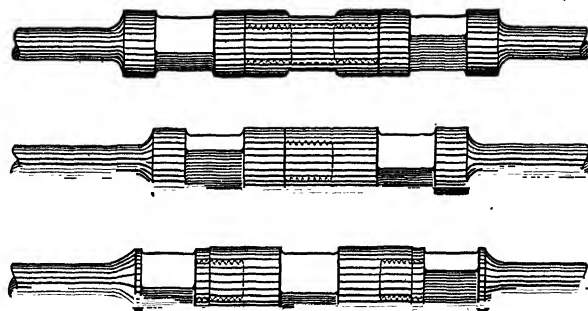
TYPES OF SUCKER-ROD JOINTS.
